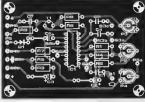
A possible printed circuit board layout for the complete circuit given in figure 3.
